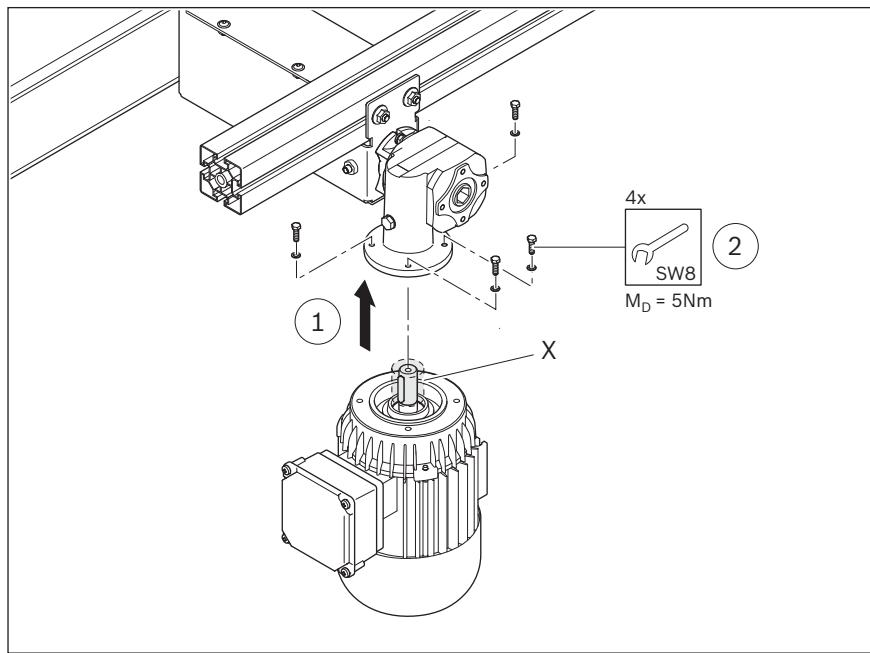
Exchanging toothed belts and/or multi V-belts, assembly (4/4)
